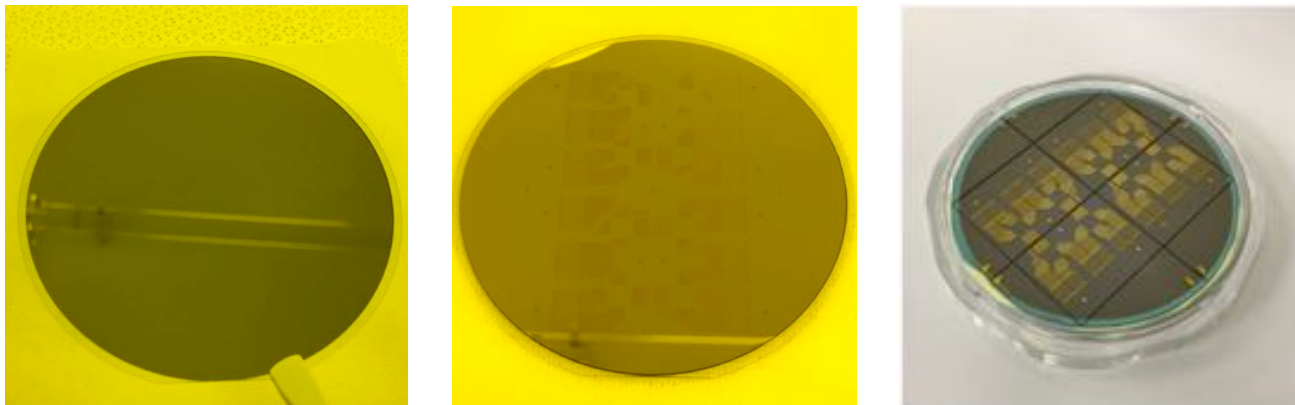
Circuit board fabrication process, after film formation (left), pattern of wiring (center) and cutting by dicing (right)
